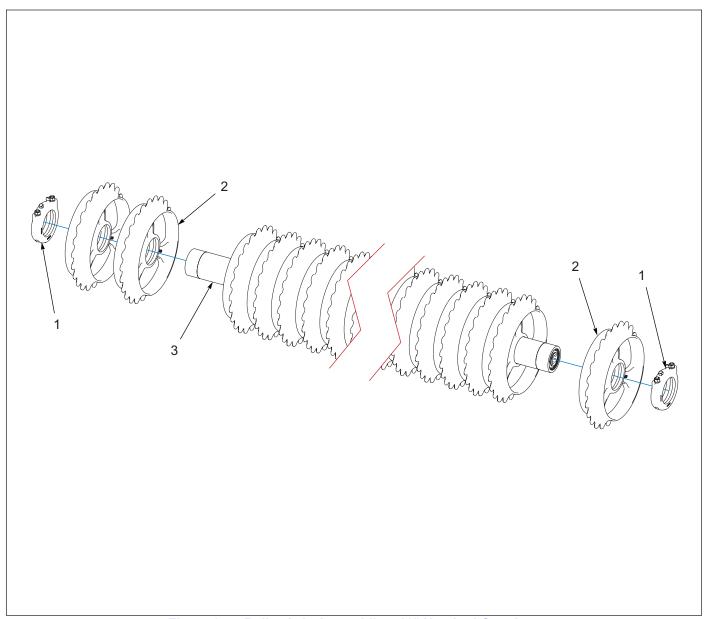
Roller Axle Assemblies, 16" Notched Gray Iron
